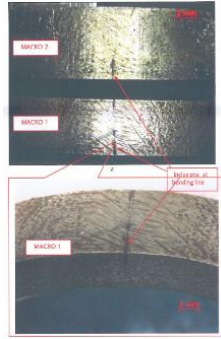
Inclusion at pipe weld seam on vintage NPS 2 gas main
